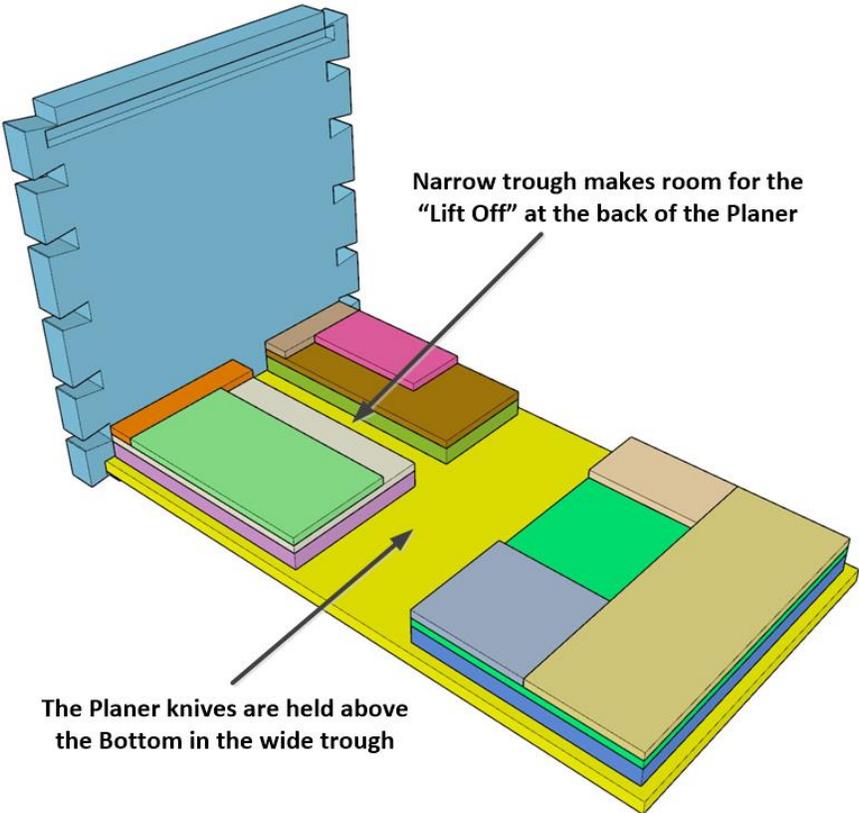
Individual Pieces of 1/4" and 1/2" Plywood Form the Floor of the Box
